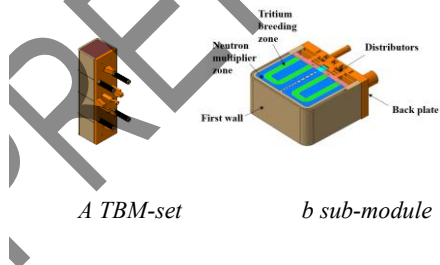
Layout and the internal structure of TBM sub-modules[10]
